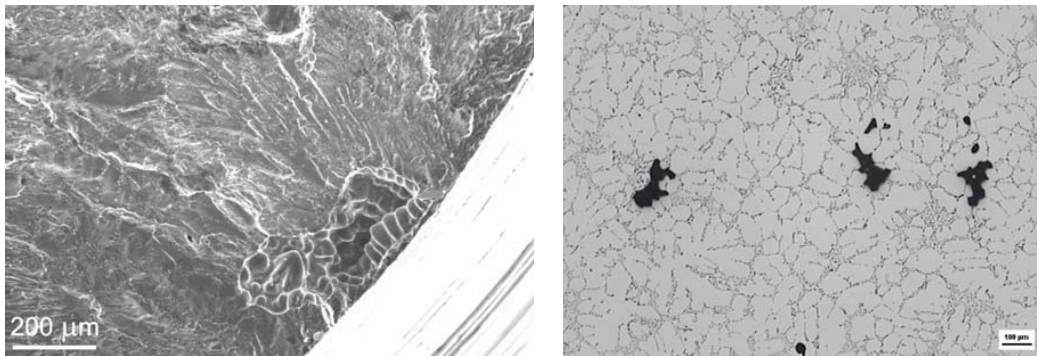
a) Fracture surface showing fatigue initiation at a casting pore near the free surface; b) metallographic image of casting pores found in an Al-Si alloy
